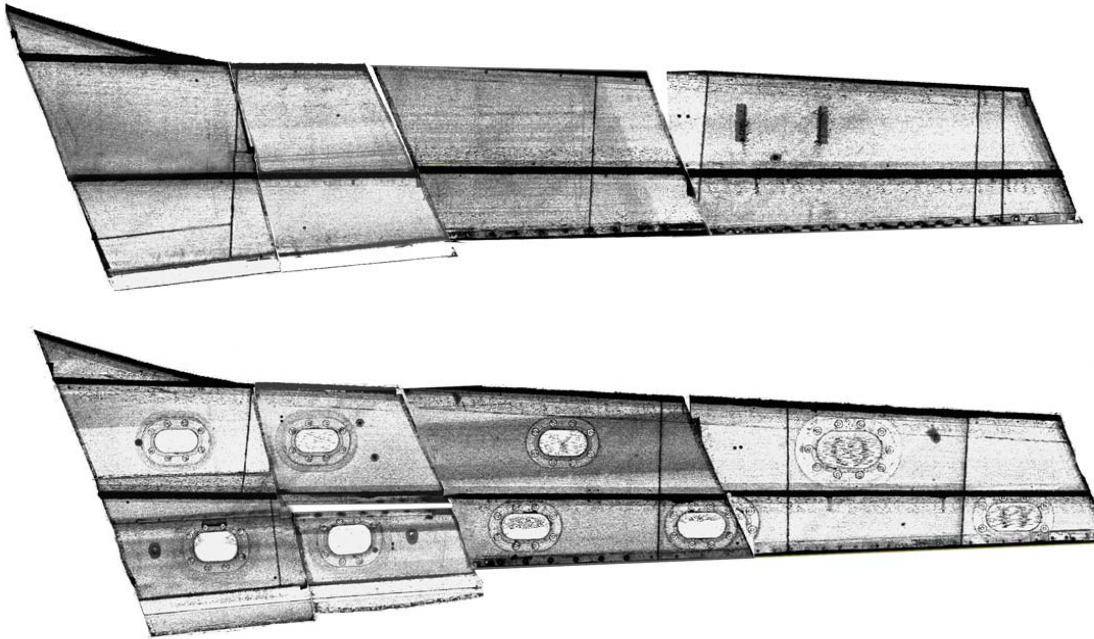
Beechcraft Starship TTU Scans of the L-H Upper and Lower wing skins
